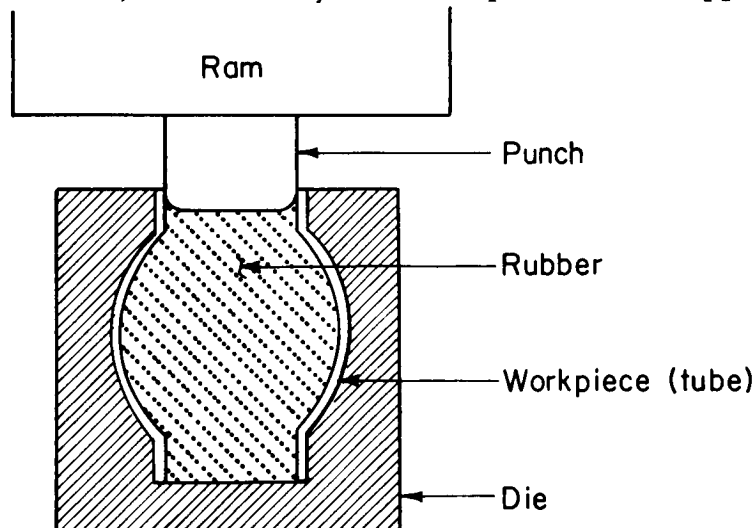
RUBBER-BULGING SETUP (REF. 59)
